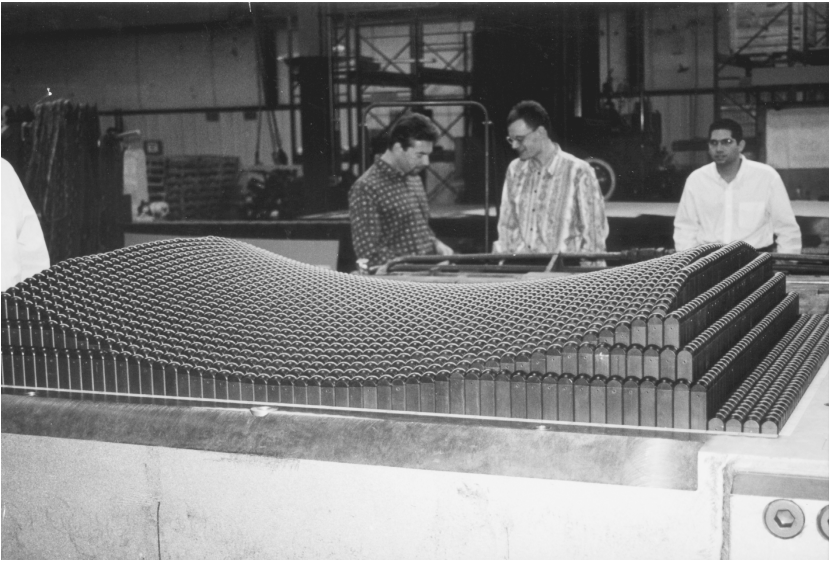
Photo of a prototype reconfigurable stretch-forming tool. The tool is comprised of > 2600 individual servo-driven pins with spherical ends.
